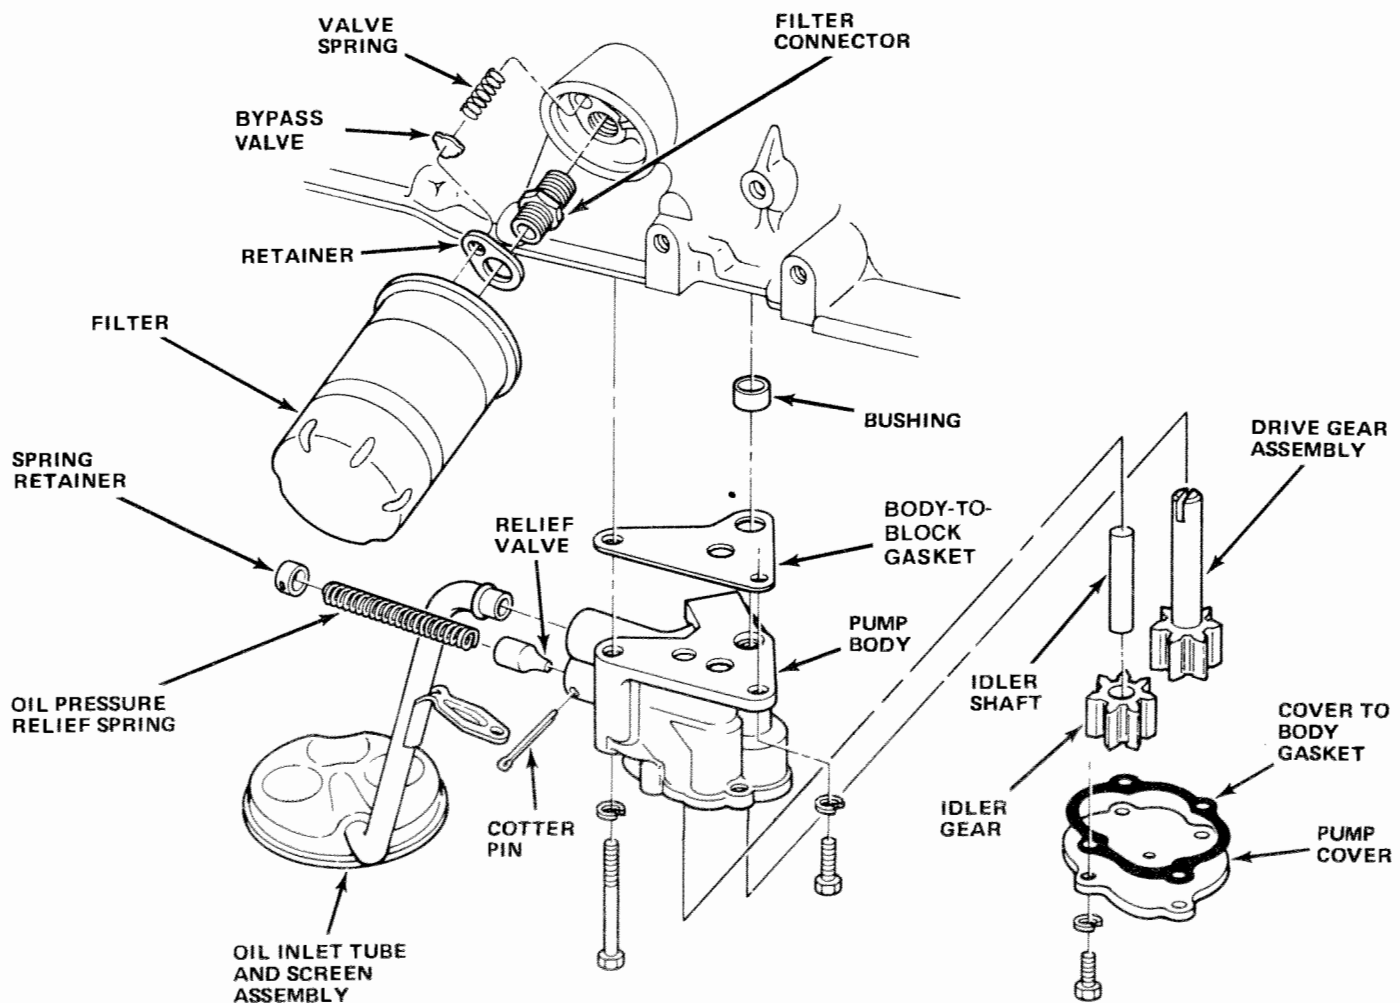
A-31 Oil Filter and Oil Pump Assembly
